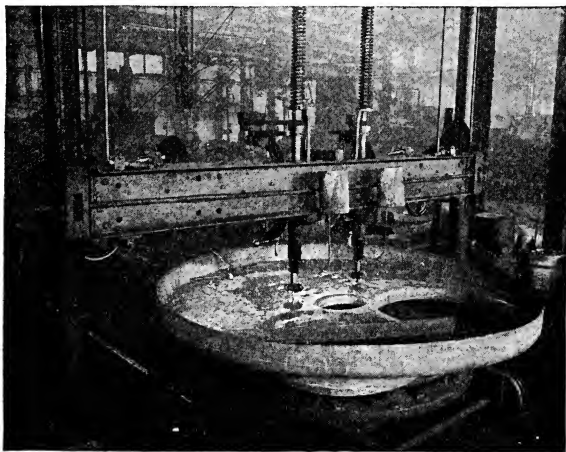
,255.—Multi-tube hole drill. It takes head up to $11\frac{1}{2}$ feet in diameter.
